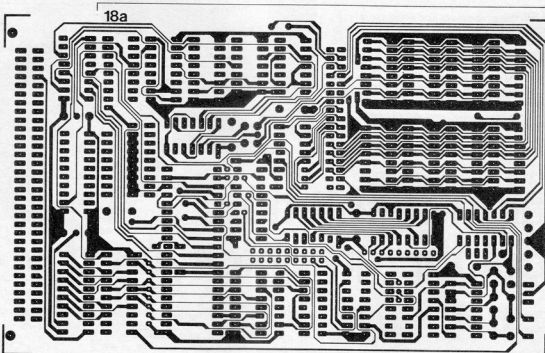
The double-plated printed-circuit board also has through-plated holes.
